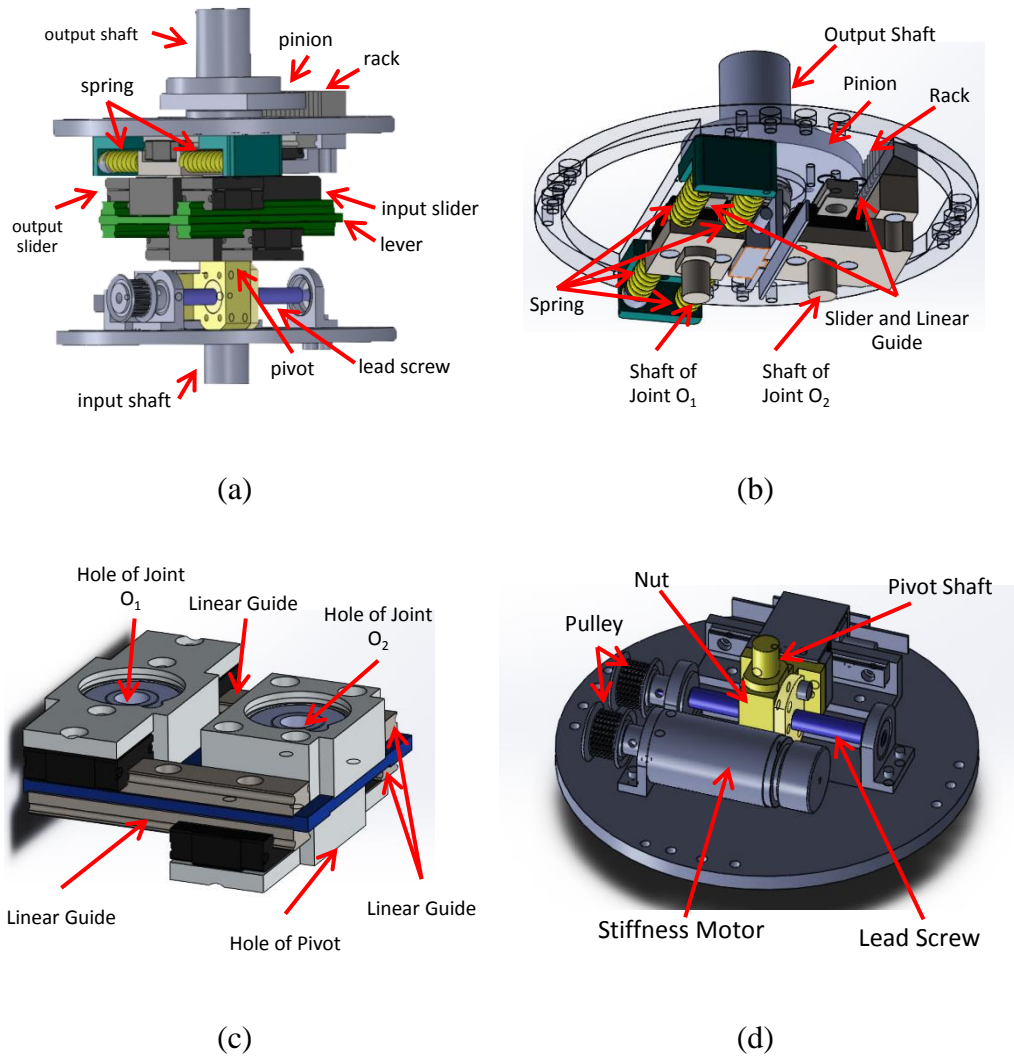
3D views of the joint design. (a) overview; (b) spring and rack-pinion; (c) lever mechanism; (d) pivot mechanism
